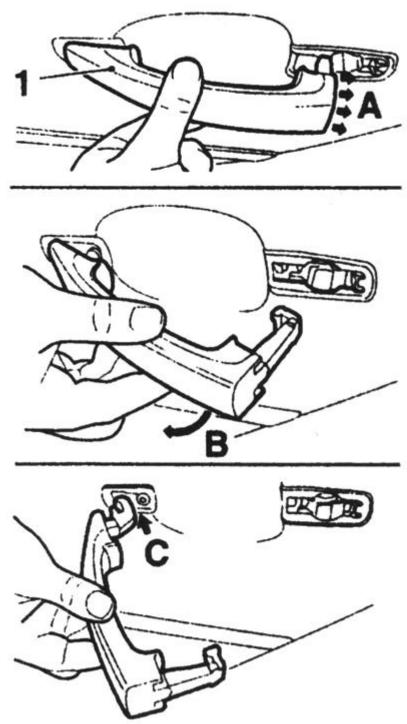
Removing the outer door handle: 1 - outdoor pen
